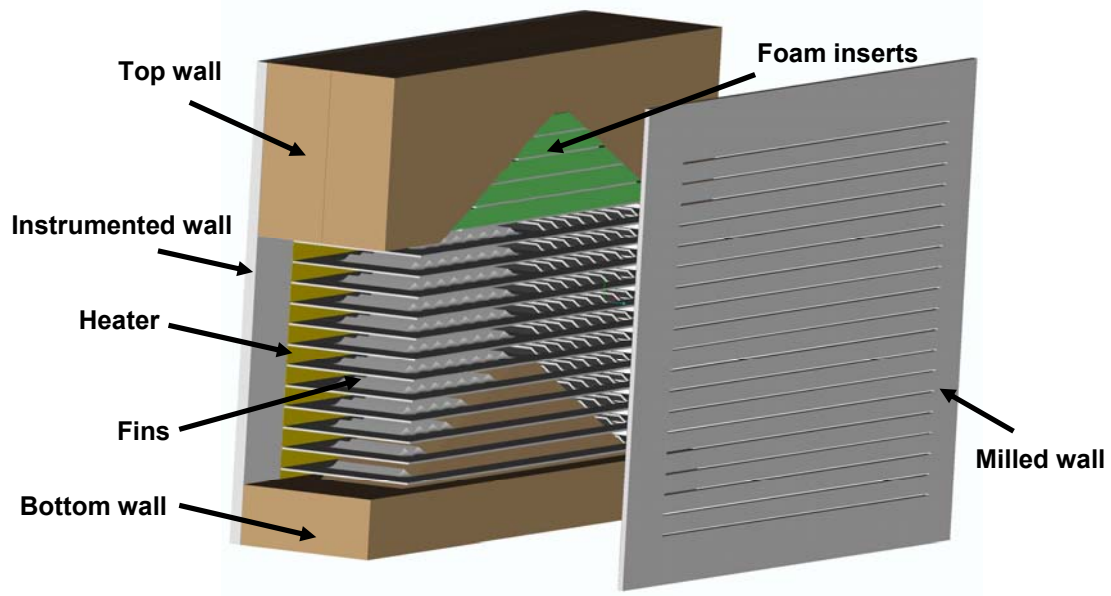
Exploded view of the $L_l/F_h = 70\%$ and $L_l/F_h = 82\%$ test section.
